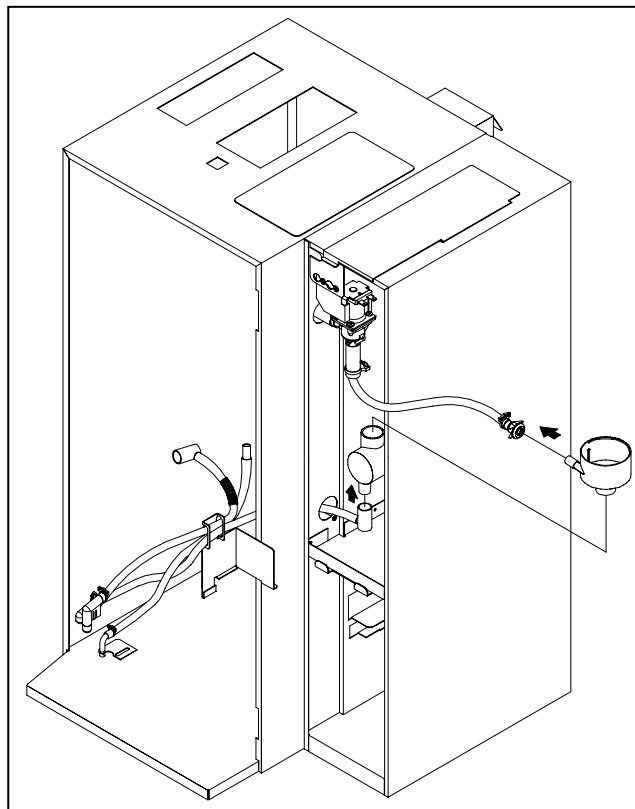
Connect the hoses inside the A.P.P. (door has been removed from illustration to simplify identification of parts).
